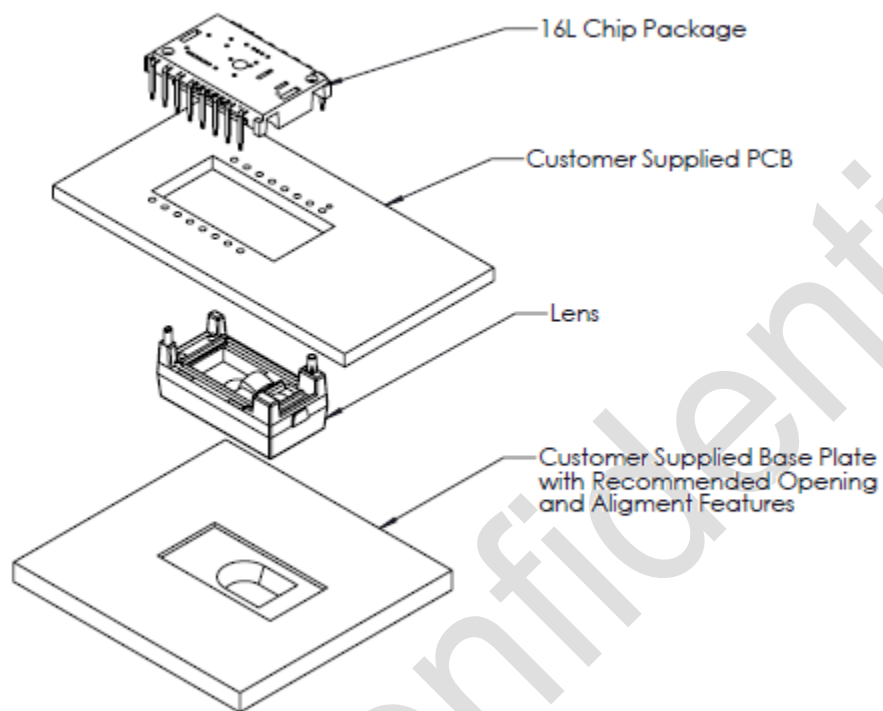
Exploded View of System Assembly with LOAE-LSI1 Lens
